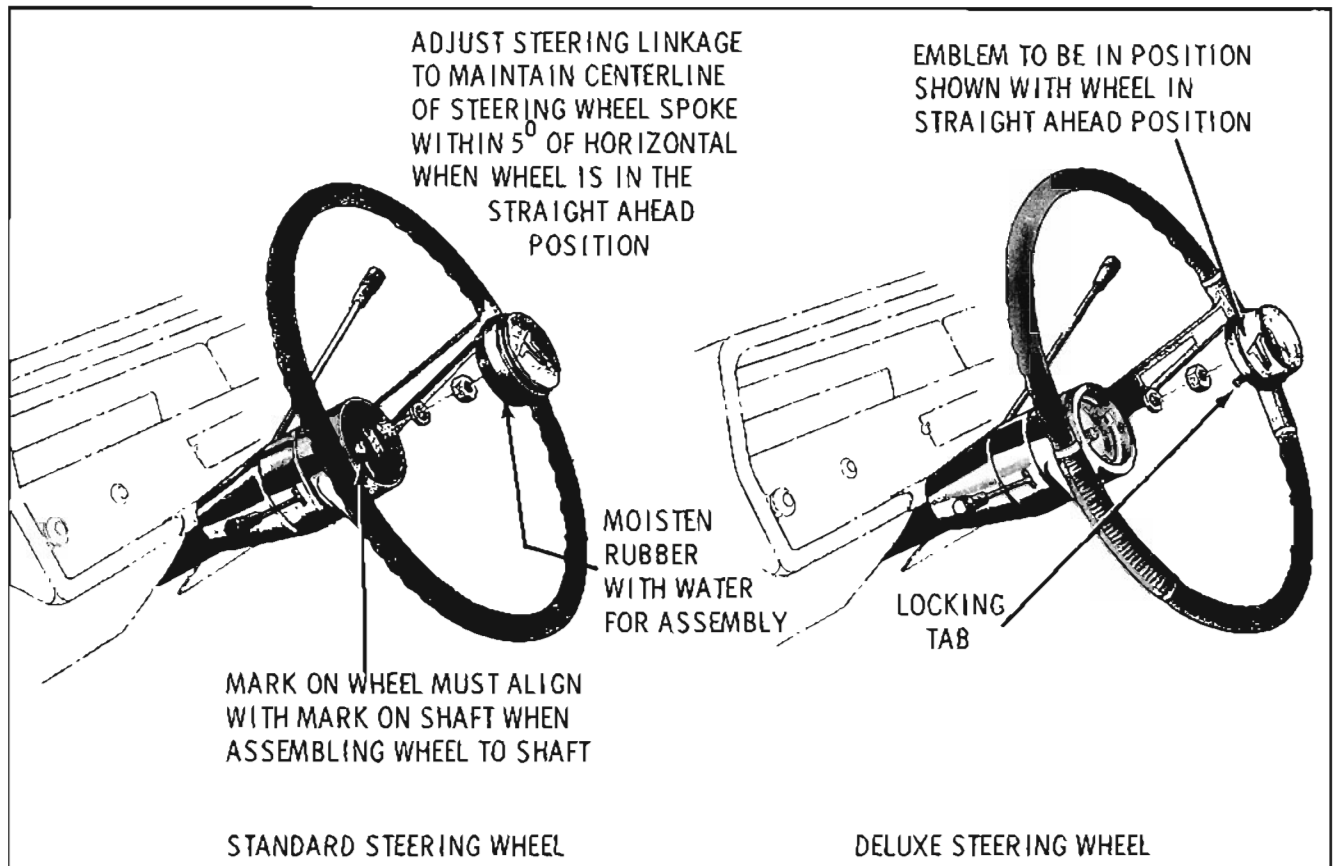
Steering Wheel Attachment (30 - 31 & 32 Series)
